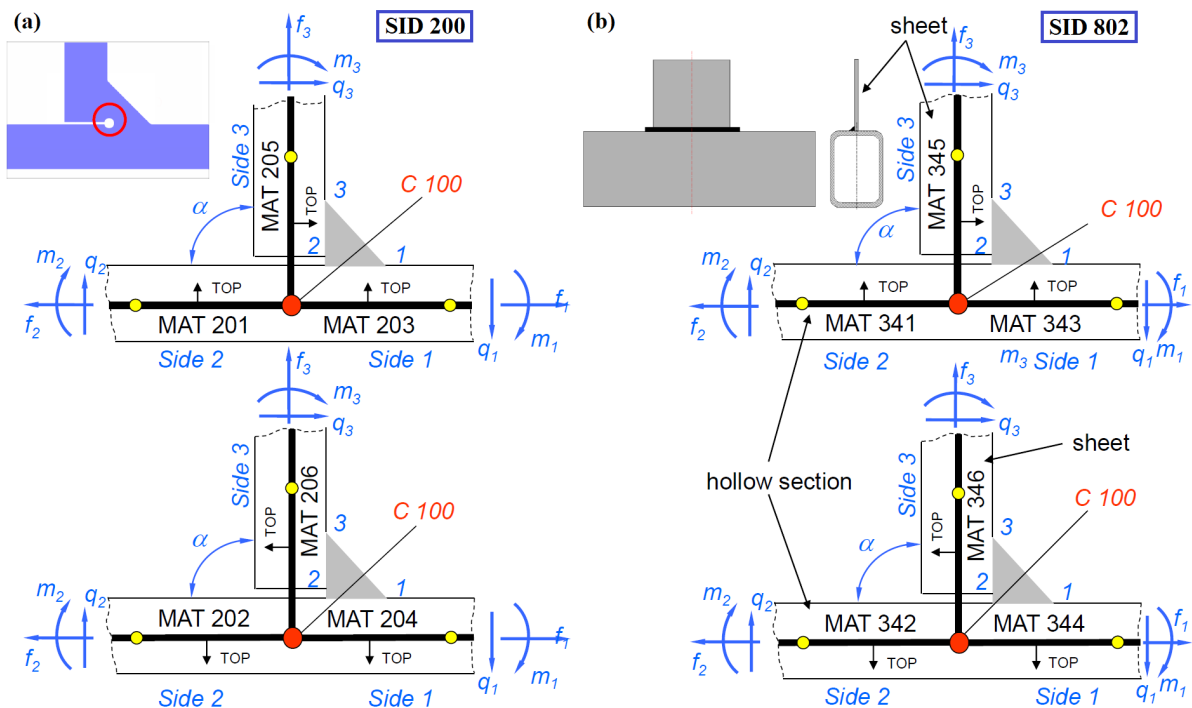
Weld joints chosen for the fatigue assessment from the database [48]: (a) one-side fillet weld with root undercut, (b) T-joint fillet weld at hollow section
